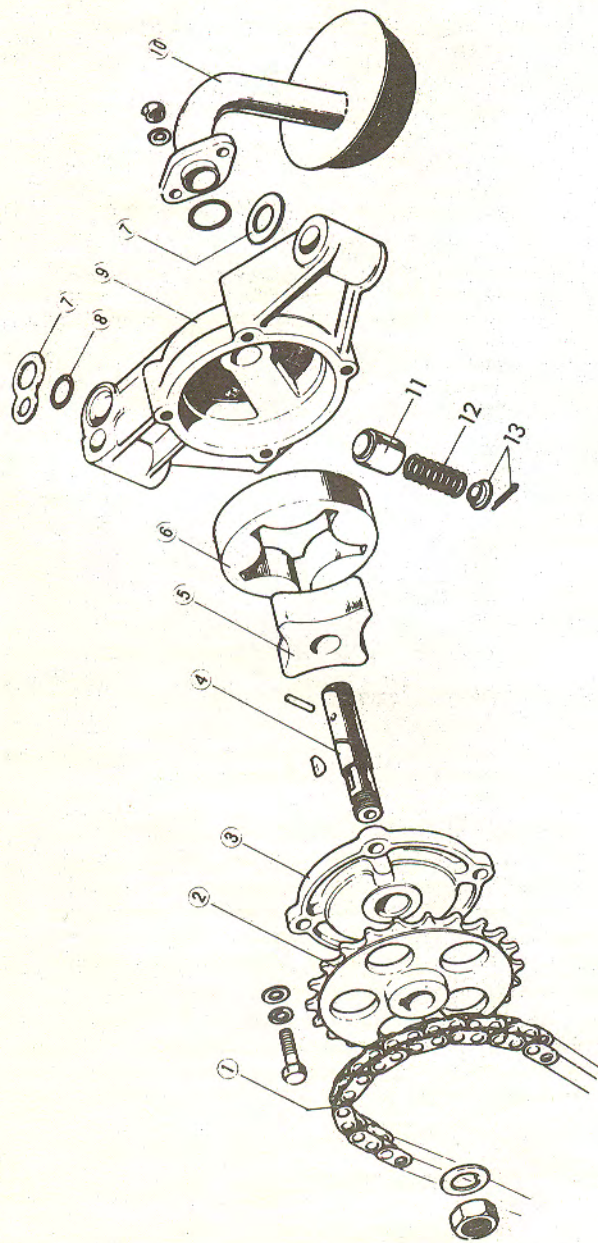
Exploded view of the oil pump together with the drive sprocket and chain.
